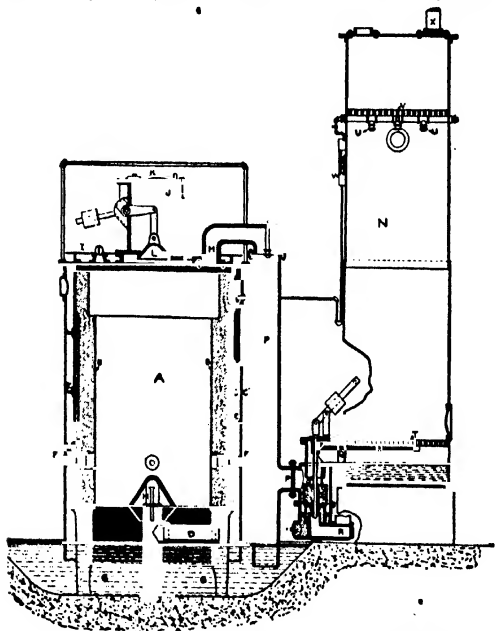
Cross Section of Fairbanks-Morse Suction Gas-Producer Arranged to Show Principal Parts
